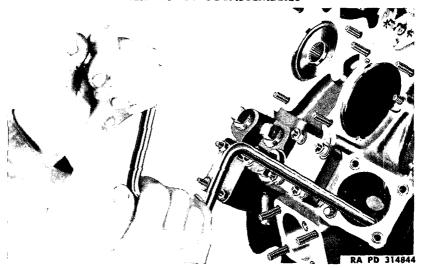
Removing Retaining Nuts from Inside of Three-way Drive Housing
